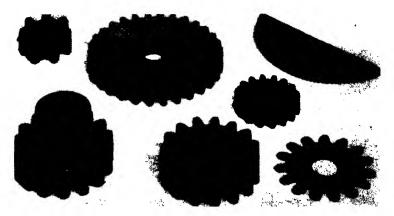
Gears formerly made of machined cast iron are replaced by these modern laminated gears built up of stampings, copper-brazed together.
